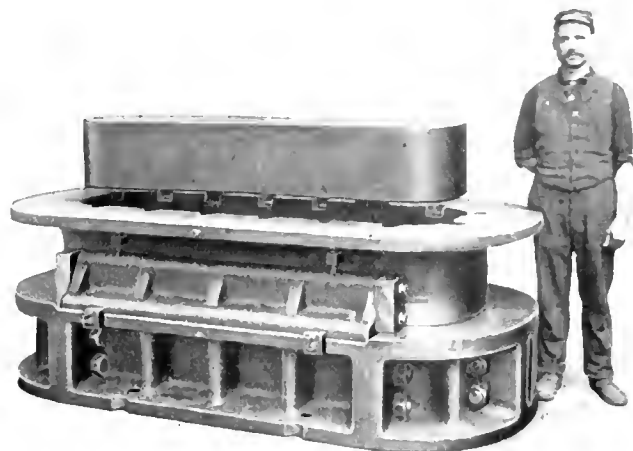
One of the Drawing Dies used in the Press shown in Fig. 1
